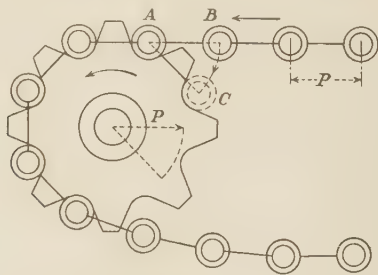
ENGAGEMENT BETWEEN A CHAIN AND SPROCKET; ANALYSIS OF IMPACT CONDITIONS
